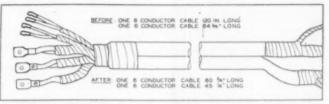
partial view of the 2 conductor cable for a double scraper hookup. Note how engineering change saved 78% in. of cable, or 38% per cent of the total cable previously used.
